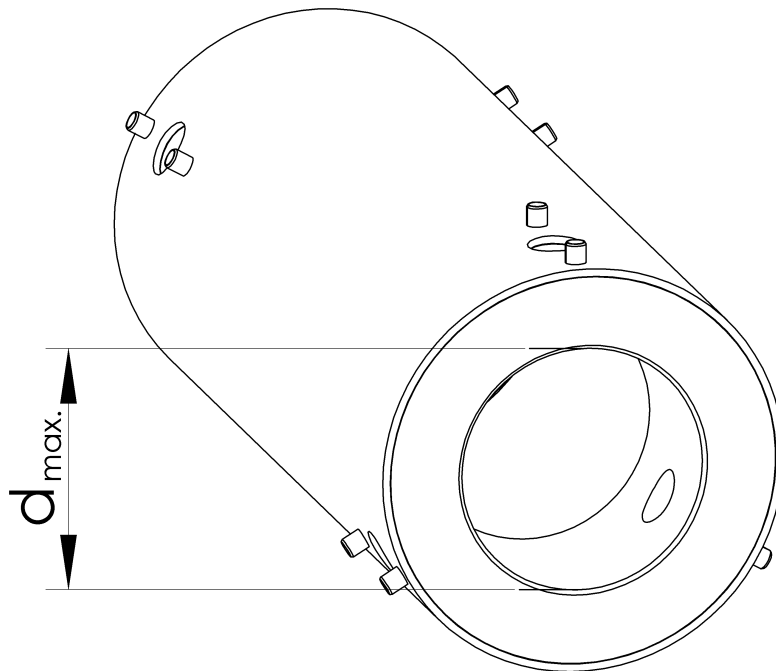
Check the inner diameter of the tube (design GZ)
